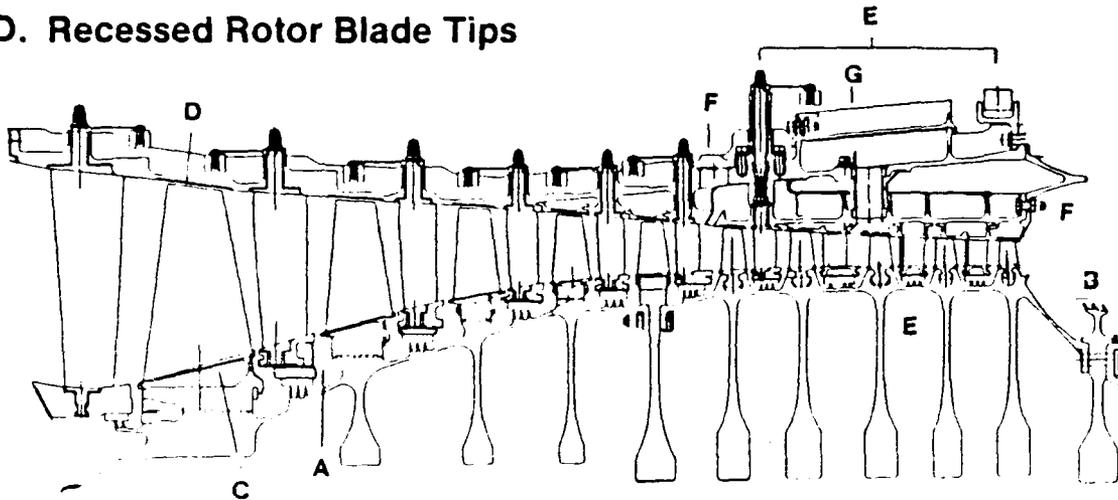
A typical multistage axial compressor design (from Wisler (1985, Fig. 9)) showing the tip clearance (D), active clearance control region (E) and other features of a modern design.
